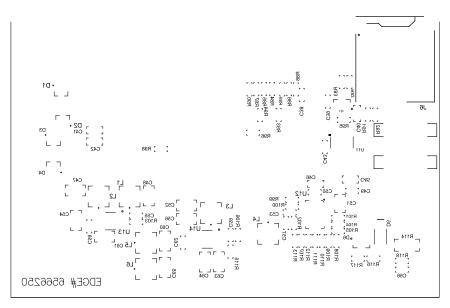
AFE44x0SPO2EVM Bottom Overlay
